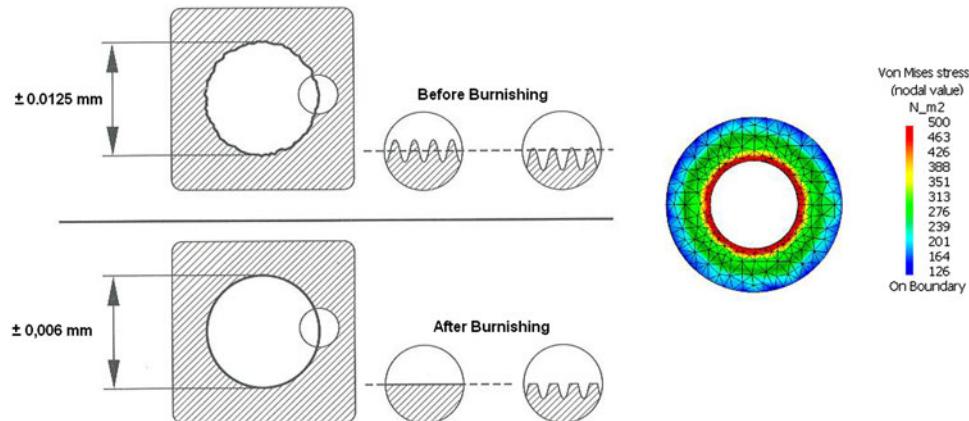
Appearance of burnished surface and surface geometry modeling of roller burnishing process (Ref 9)
